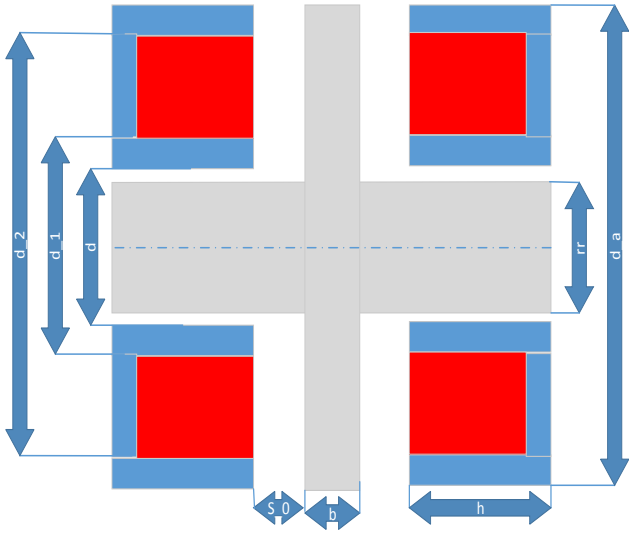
Axial AMB with dimensions. rr is the rotor diameter, s_0 is the air gap, d is the inner diameter, d_1 is the inner winding diameter, d_2 is the outer winding diameter, d_a is the outer diameter, b is the thickness of the thrust disk, and h is the axial stator length.
